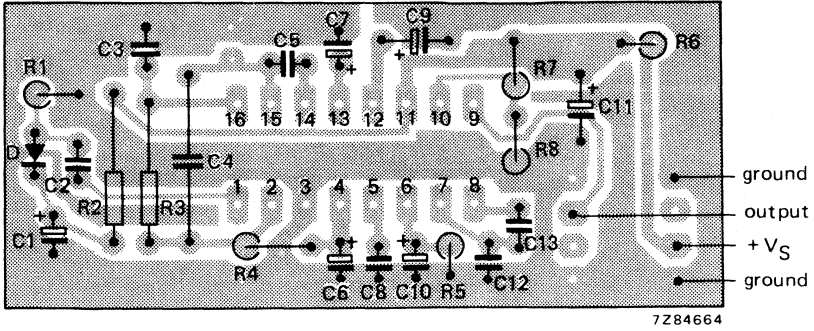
Component side of printed-circuit board showing component layout used for the circuit of Fig. 7.
